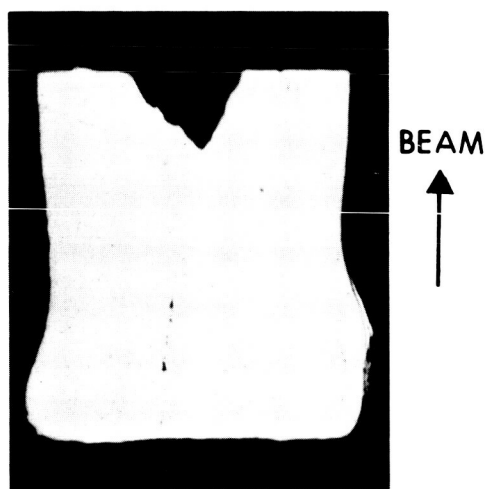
CROSS SECTION OF THE DEEPEST PIT (X16)
